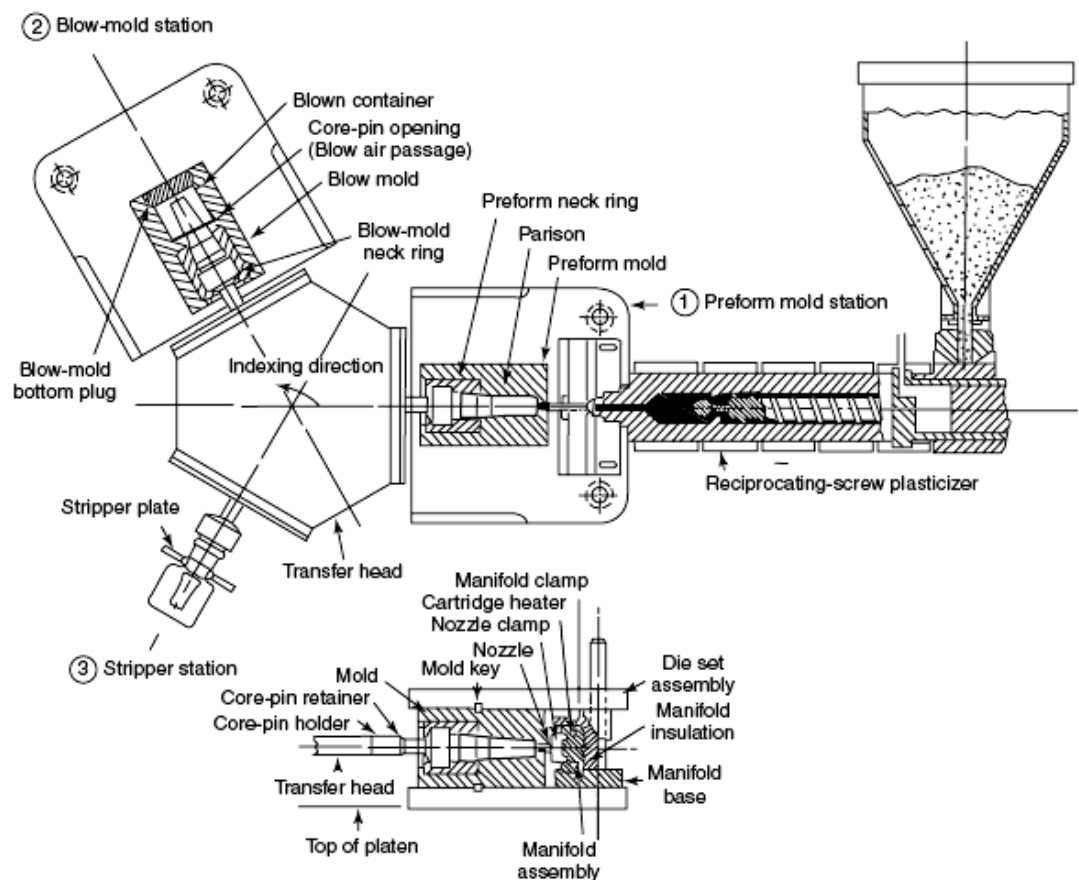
A typical three-station injection blow-molding machine. Courtesy of Rainville Operation, Hoover Universal, Inc.
